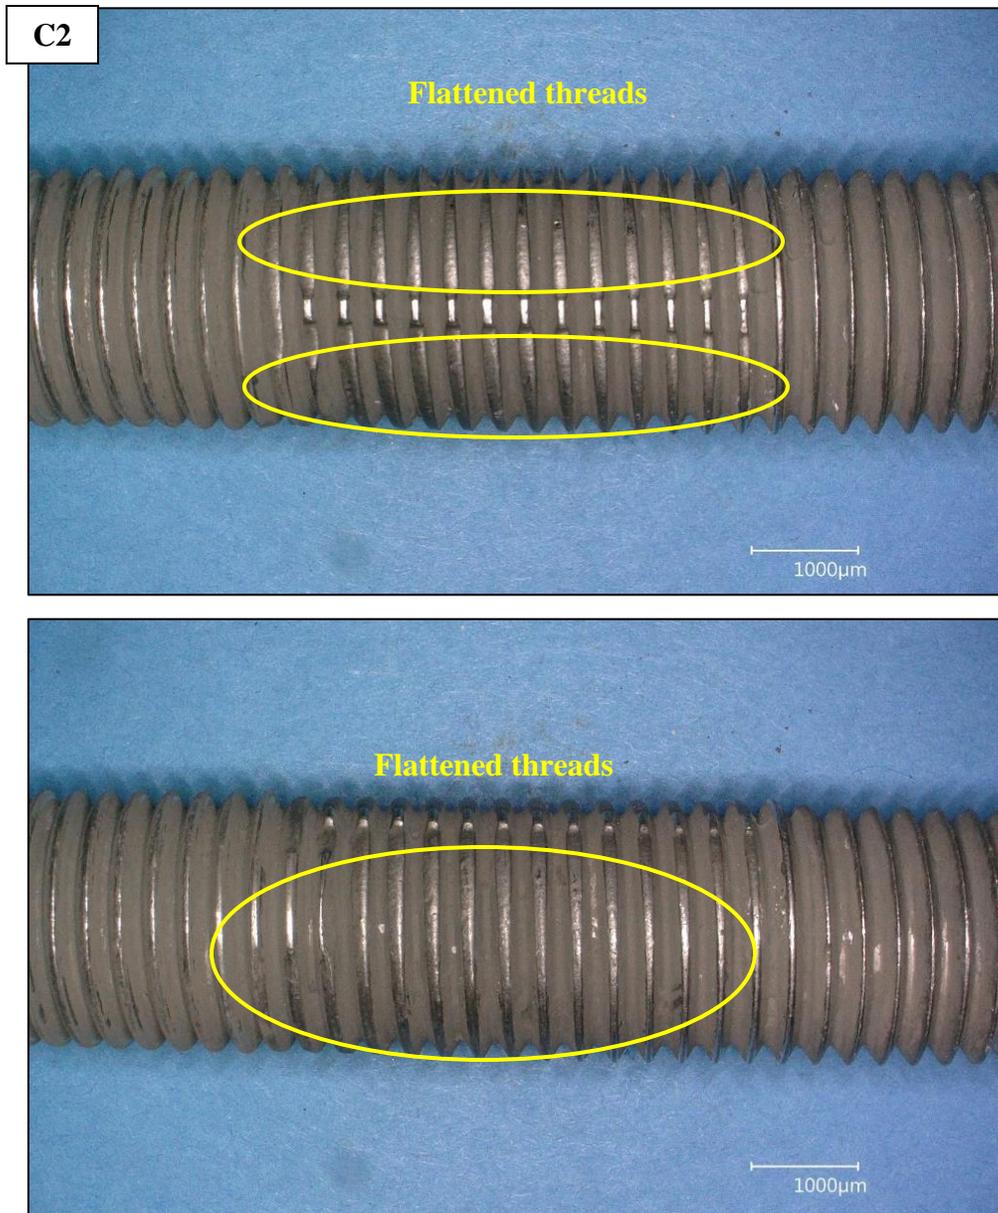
PHOTOS OF STRIPPED THREADS ON BOLT C2 REMOTE THE FRACTURE.
